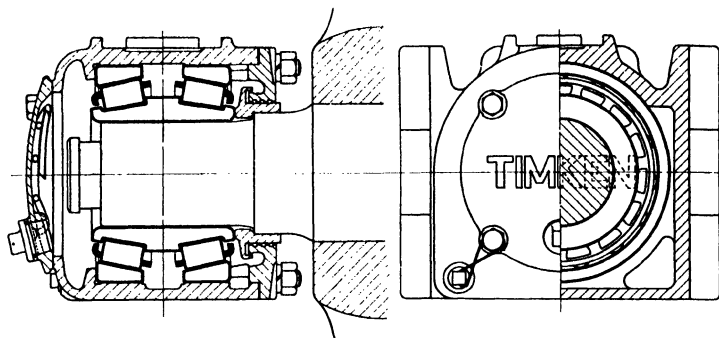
Outboard Axlebox—Electric and Diesel Locomotives, Motor Coaches, Passenger Coaches and Wagons.
